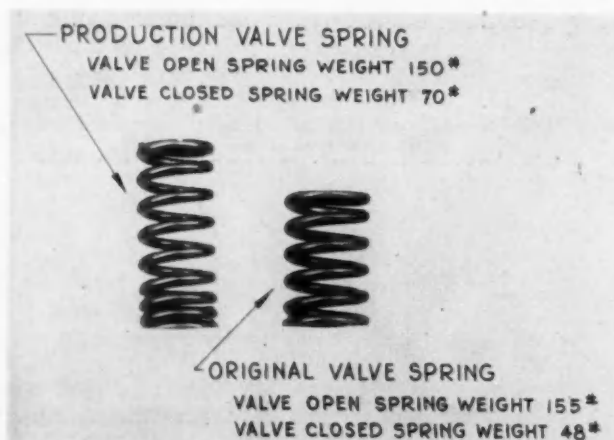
Violent surge encountered with the original valve spring was eliminated by using the production valve spring
